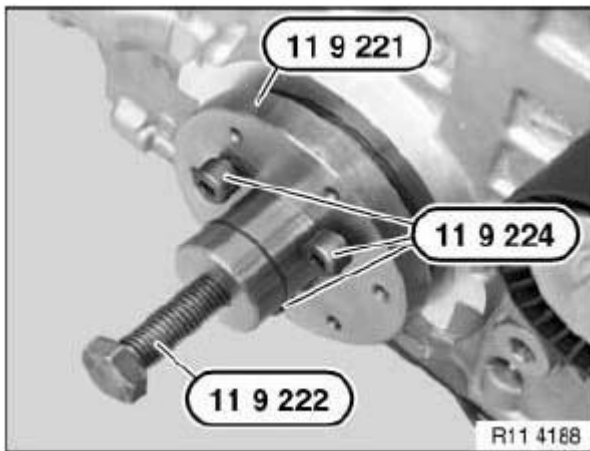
Identifying Special Tool (11 9 224), (11 9 222) And (11 9 221)
